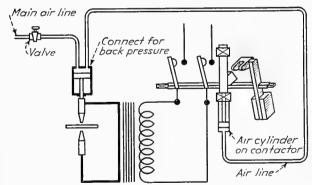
Contactor works on back pressure from the main cylinder on the welder, pressure being assured between the welding points before the welding contactor closes. When the back pressure has built up to a predetermined value, the plunger moves upward at a definite rate of speed and the hardened cam closes the main contacts. After a predetermined time, the cam moves by the roller that it engages and the main contacts open. One adjustment sets the back pressure at which the contactor plunger starts to move and therefore determines the lag in applying the current after pressure has been applied. A second adjustment changes the needle valve opening to the contactor air cylinder and thus times the upstroke. This determines the welding time. A third adjustment varies the time of the downstroke and is of importance only when used with a repeater.
